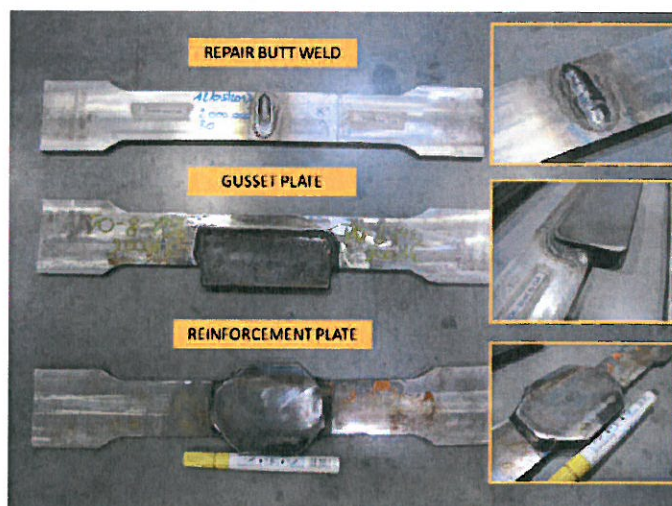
• Fatigue test samples with critical weld details of overhead cranes. Top: repair butt weld; middle: gusset plate; bottom: reinforcement welded under the beams.
